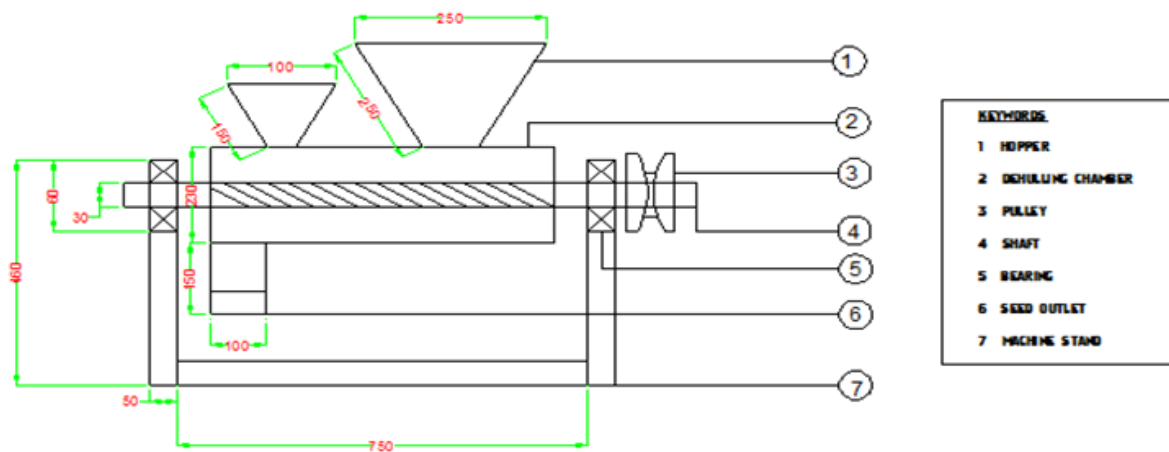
Orthographic projection (side view) of the soybean dehulling machine. (All dimensions in mm).
